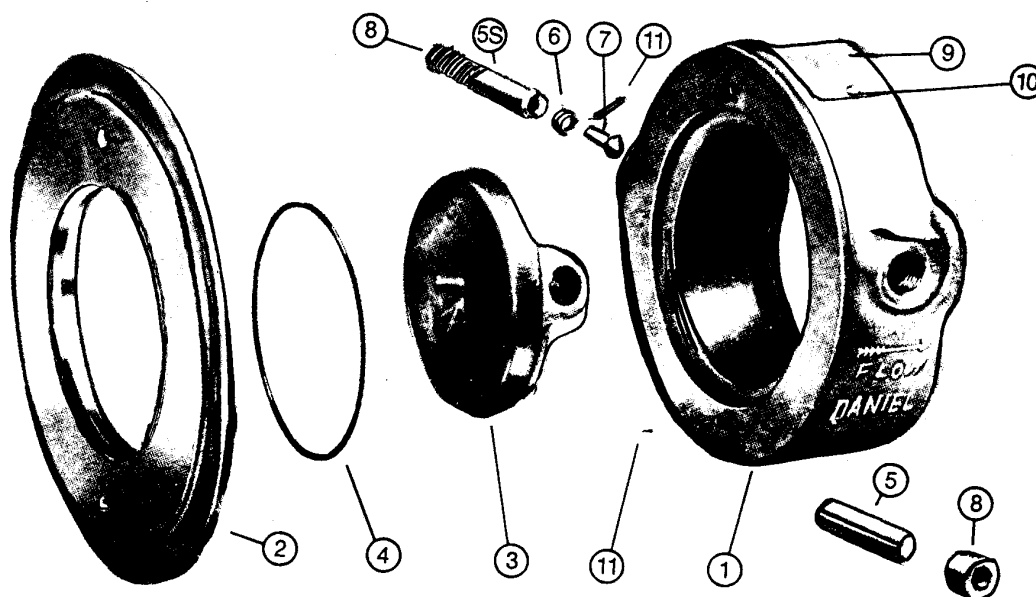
Identification of parts of tilting-disc check valve : 1. Body, 2. seal housing, 3. disc, 4. soft seal, 5. hinge pin (without spring), 5S. hinge pin (slotted for spring), 6. spring, 7. spring retainer, 8. locking plug, 9. name plate, 10. name plate drive screw, 11. roll pin.
